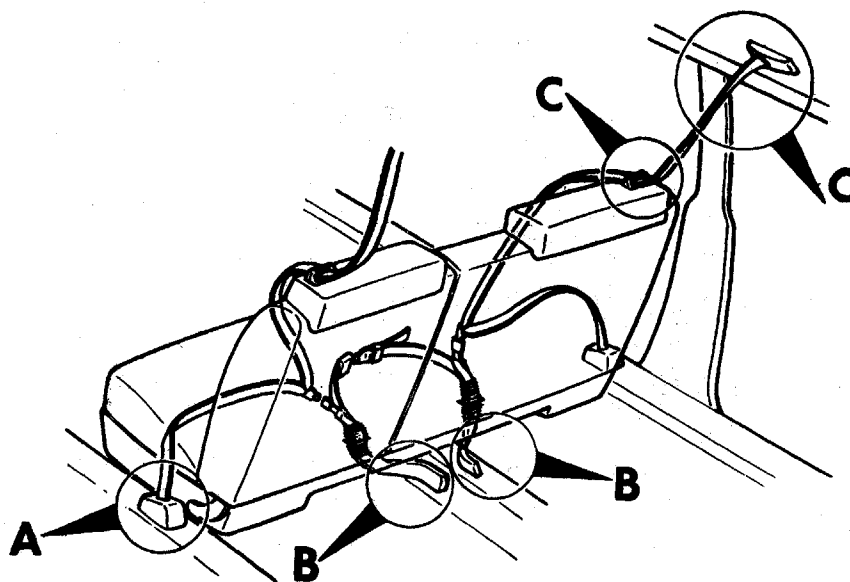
Screw-in Type Seat Belt Sleeve Plug Installation
